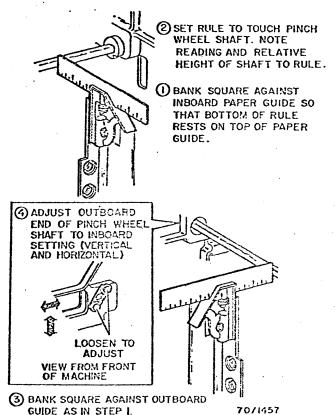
Pinch Wheel Shaft Assembly Parallelism
